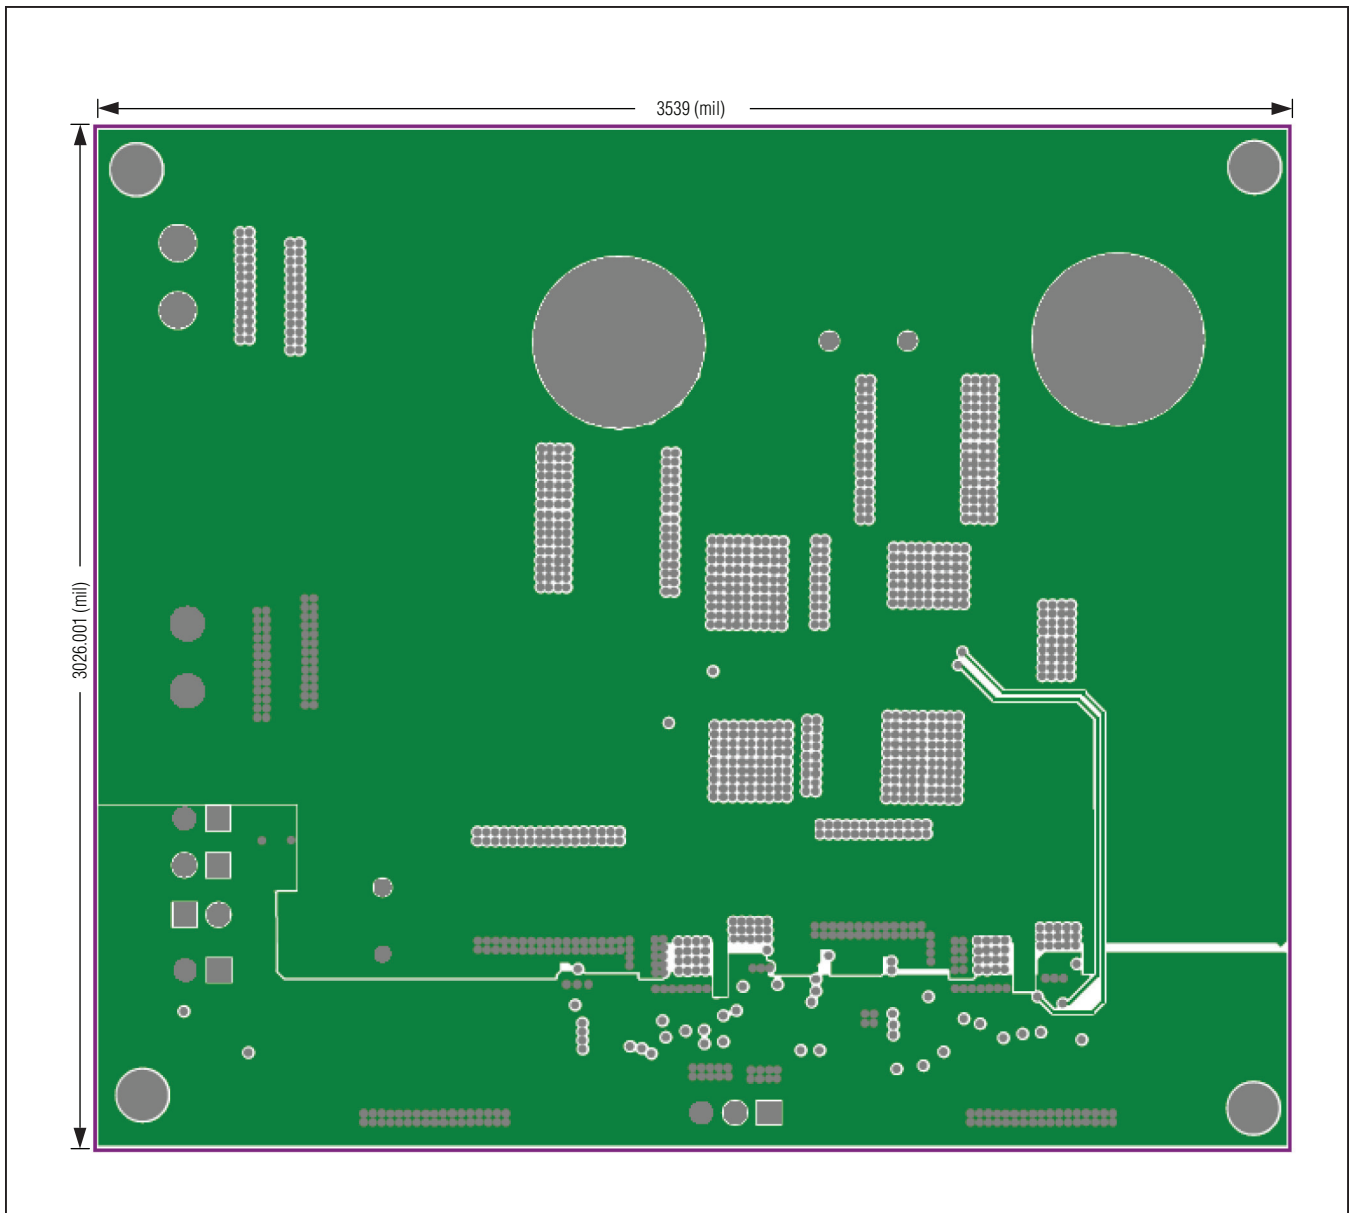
MAX8686 EV Kit PCB Layout—Layer 3 (VIN and AGND)
